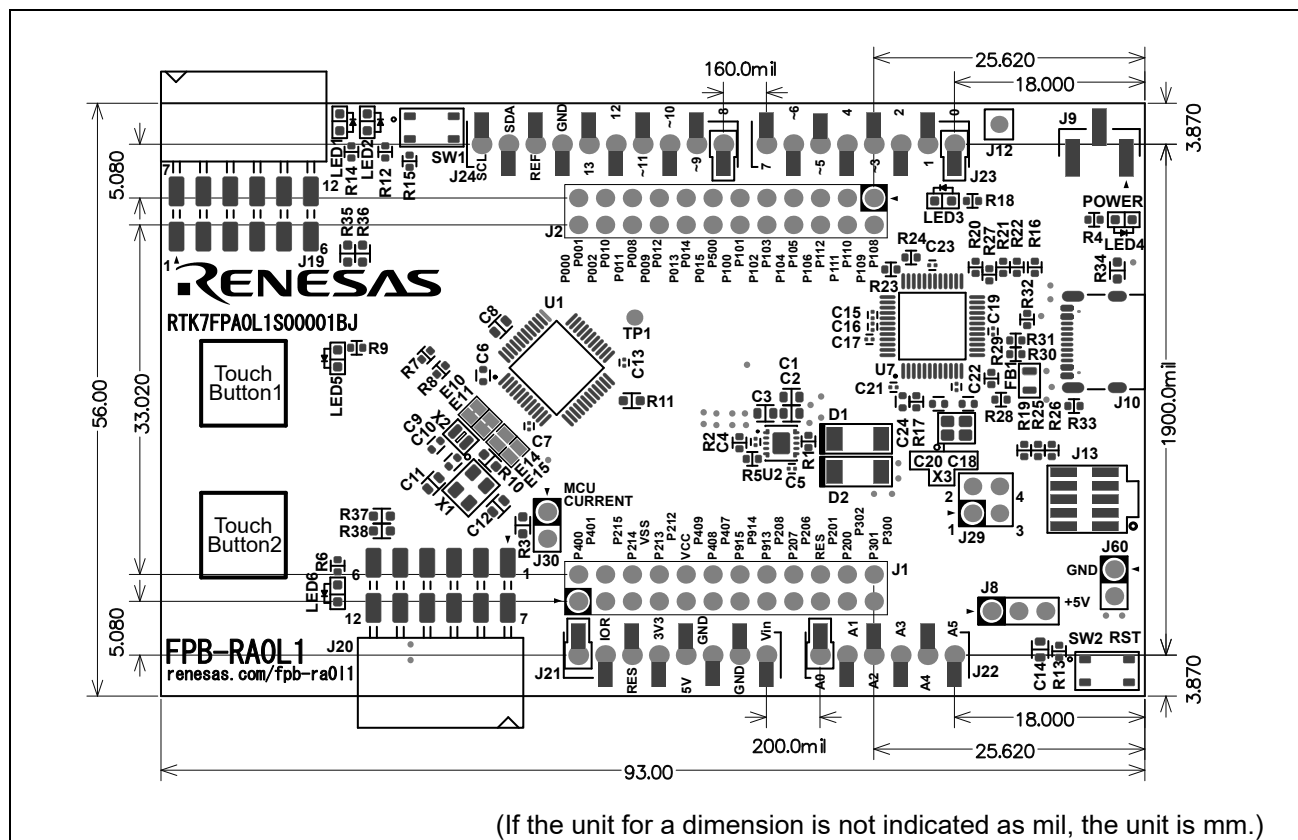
Layout Diagram of Components on the FPB-RA0L1 Board (Top View)
